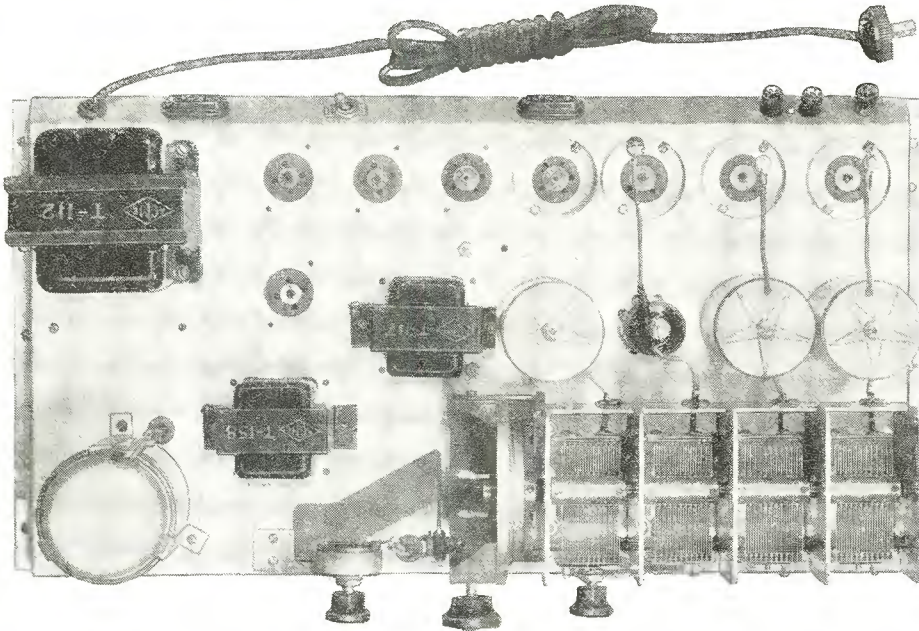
The top view of the Acme 98 chassis available in unwired form is shown in this photograph
